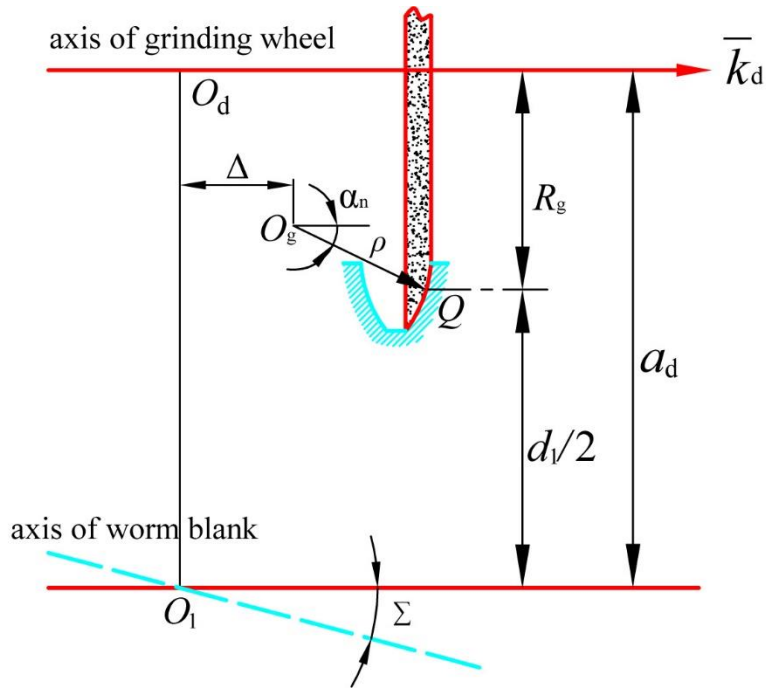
(b) Position relationship of grinding wheel machining worm blank
